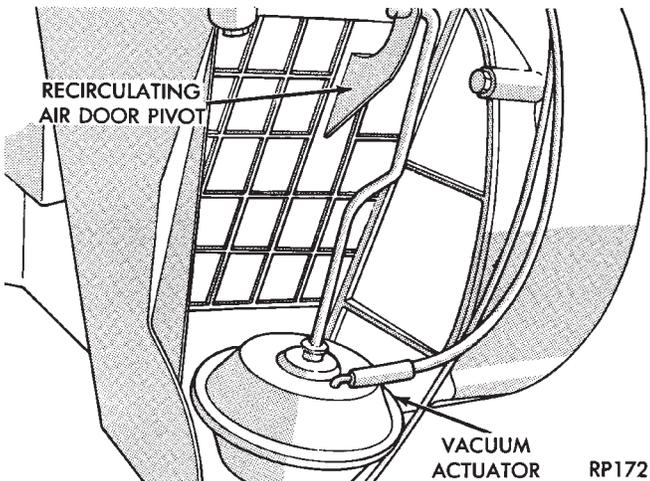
Recirculating Air Door Vacuum Actuator—Typical
